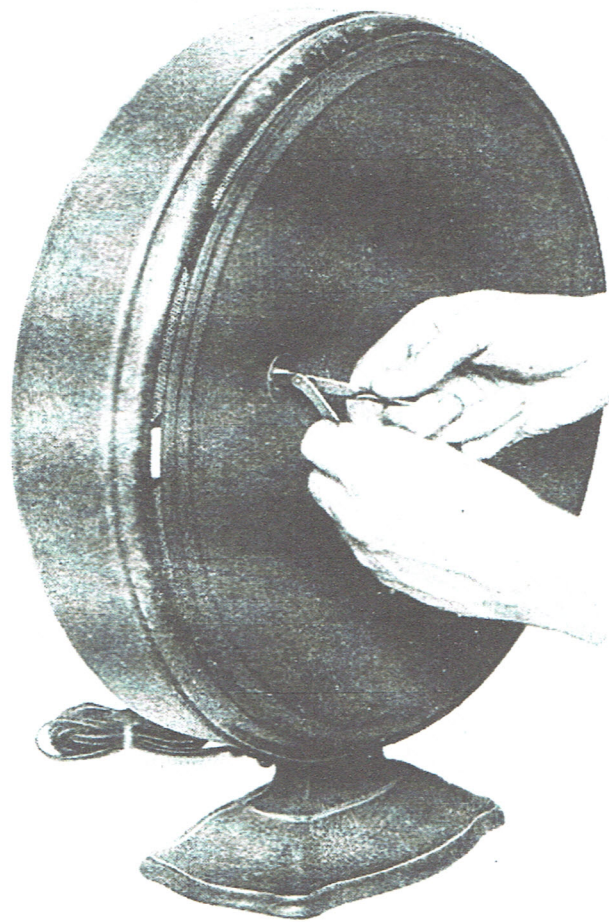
REMOVING CONE, MODELS E AND E-2.
